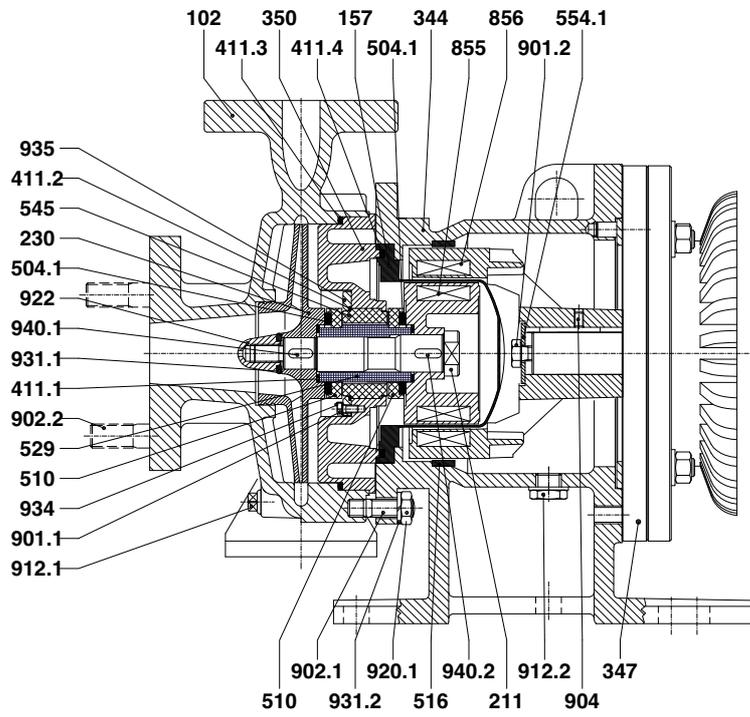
Cross-section ETS 30/40 with motor size 80/90.
